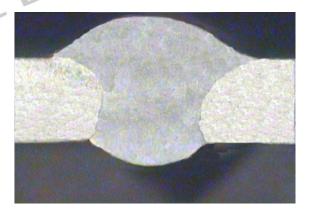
1.2 115 A, 26 V, 40 cm/min condition P = 3.19 mm. An over penetrated weld joint.[2]
